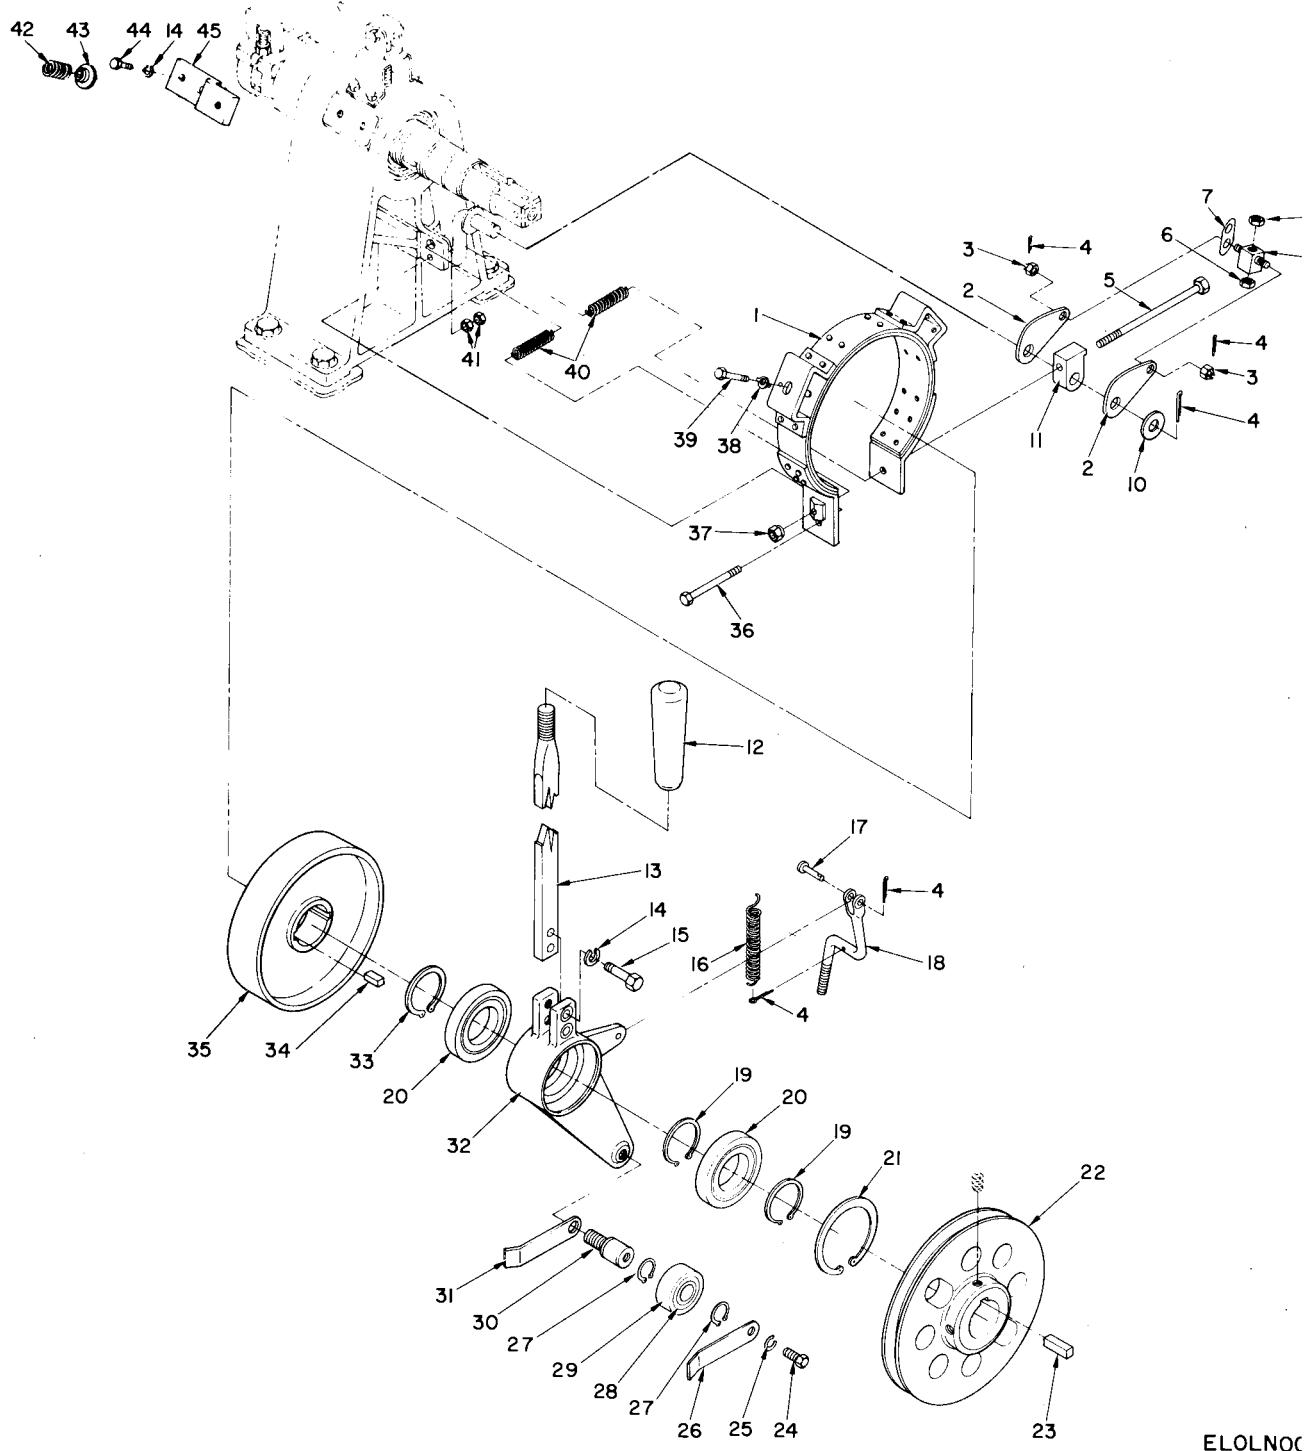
Clutch and Brake Assembly 1A2 (Sheet 1 of 2).
